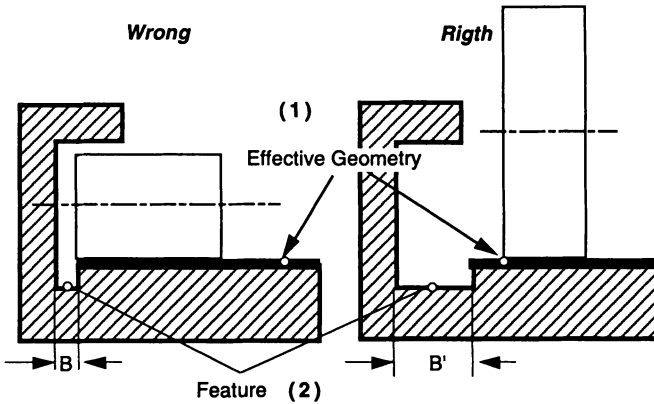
Design guideline for unimpeded grinding by appropriate selection of surfaces
